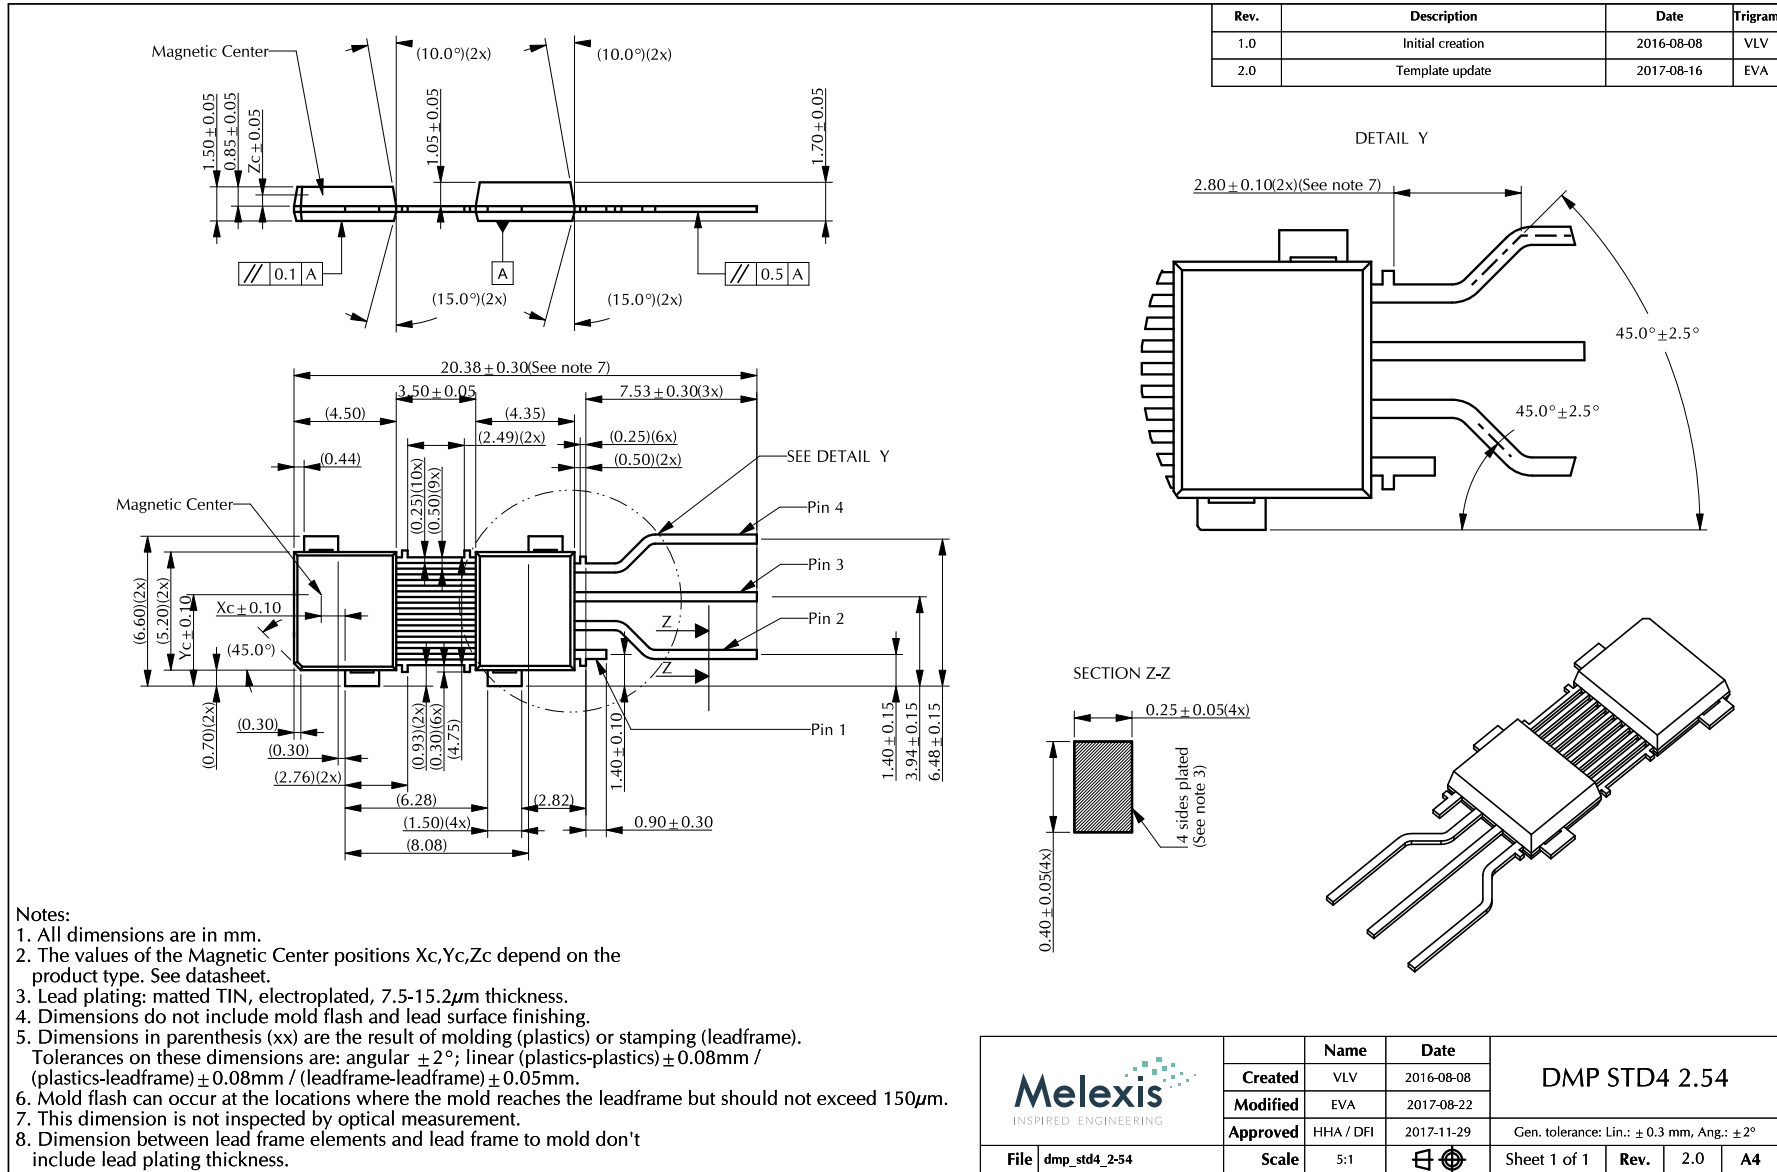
DMP-4 STD4 2.54 Package Outline Drawing
